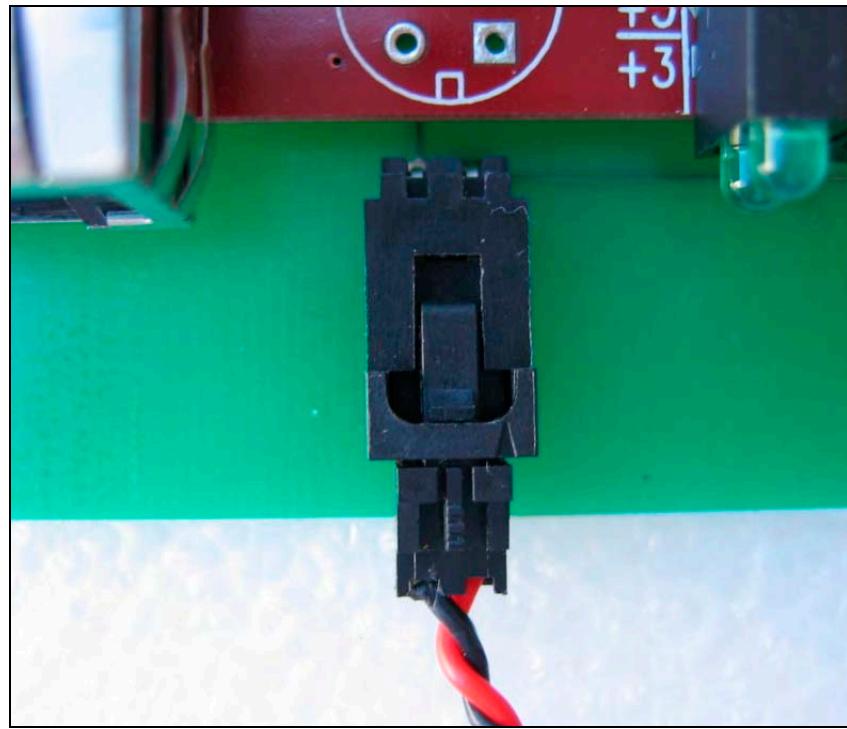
5-VDC power connector mated to header on PC/104 card.
